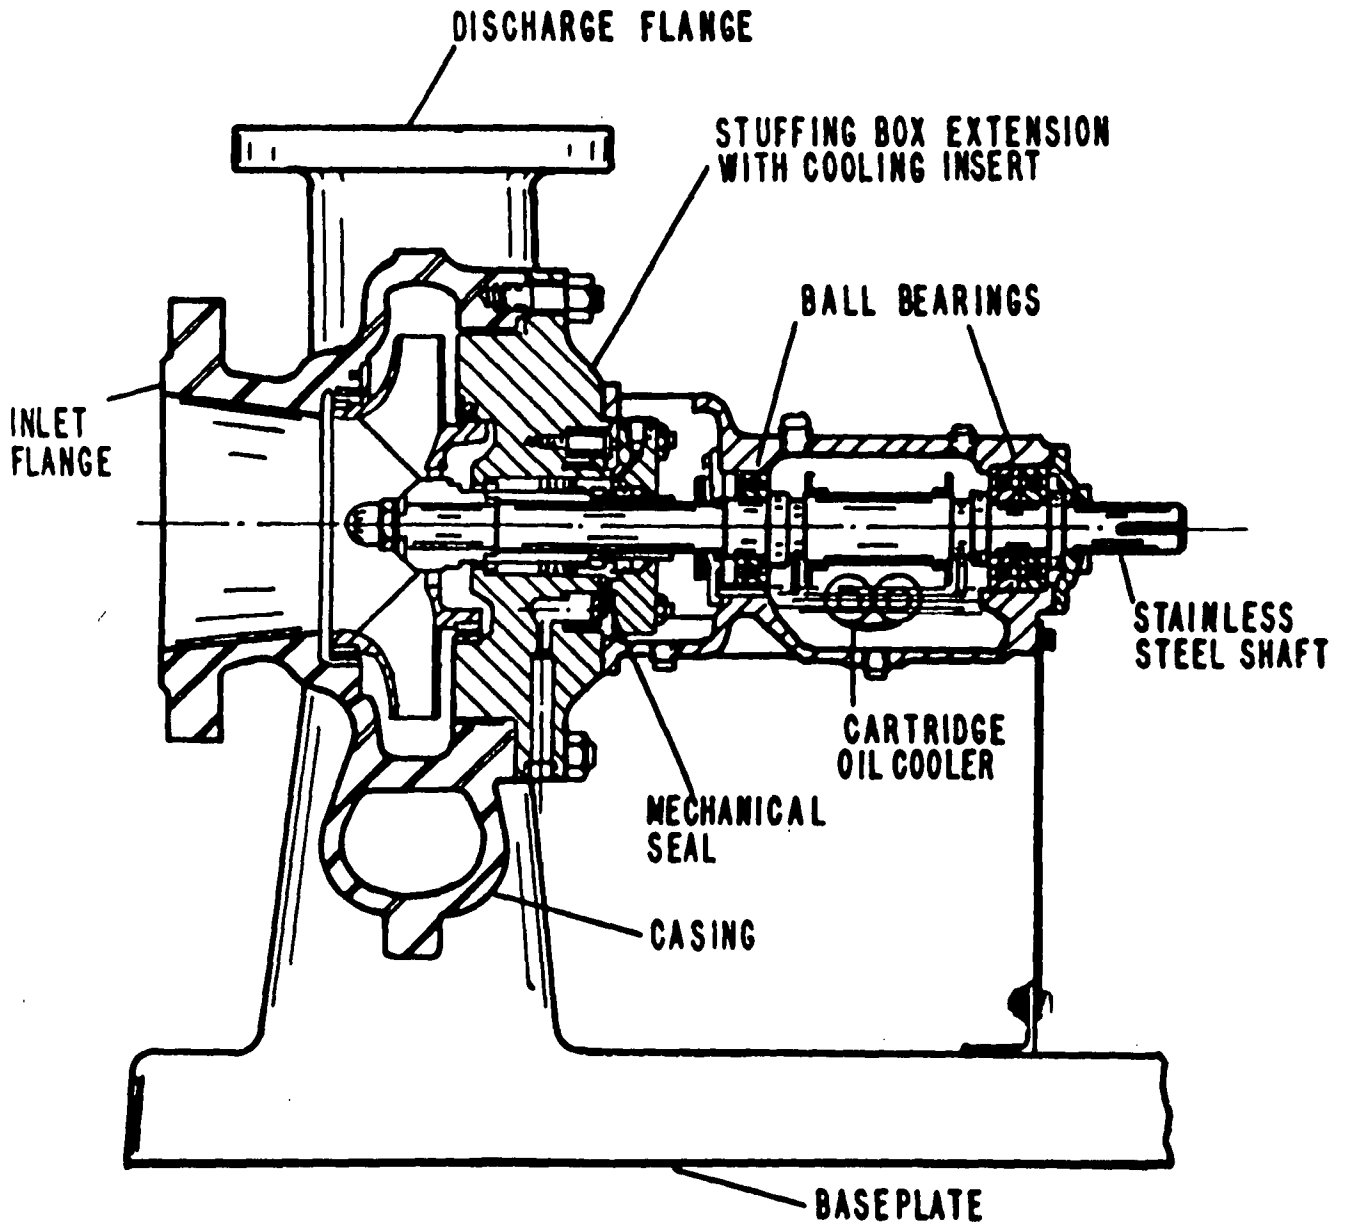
TYPICAL HORIZONTALLY MOUNTED RHR OR CSS PUMP
